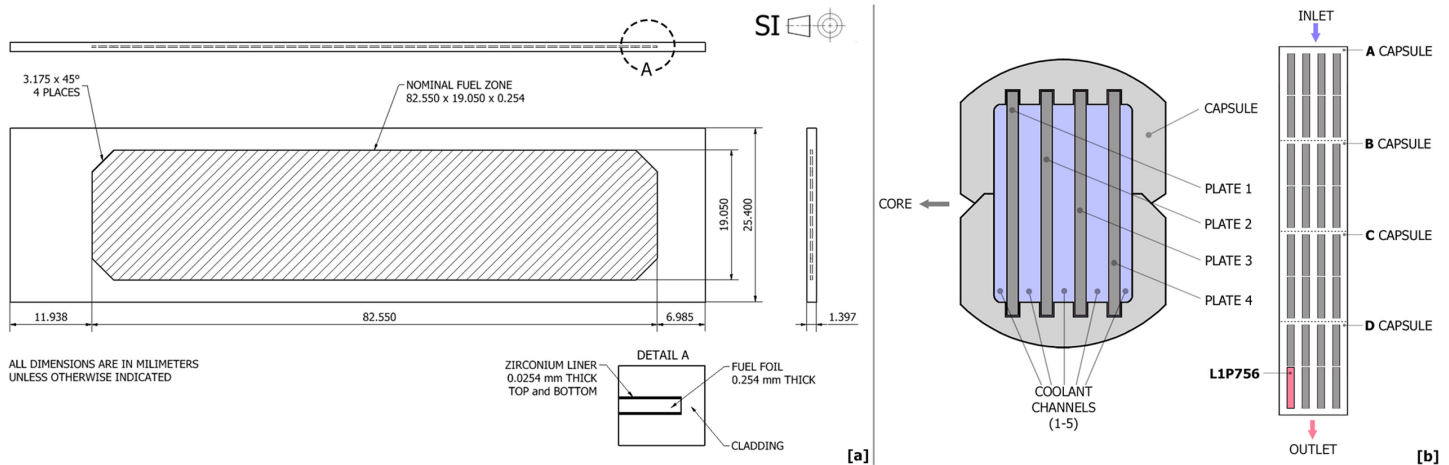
(a) Mini-plate dimensions that were used in the model (b) Capsule, coolant channels and position of L1P756
